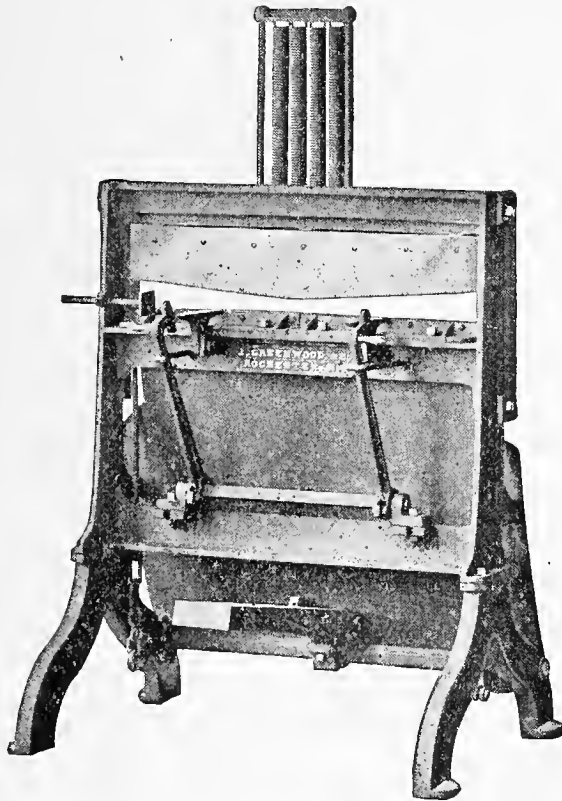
SLACK STAVE FOOT-POWER JOINTER.
